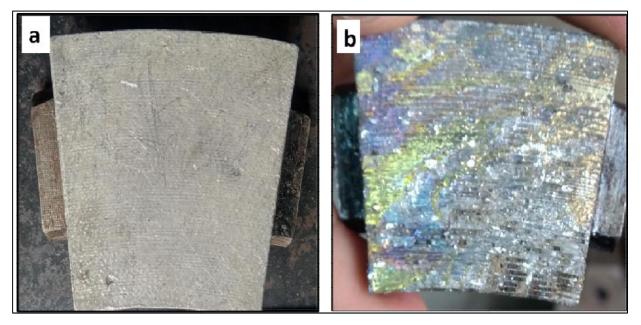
(a) Procured sector shape pad (b) Surface appearance of the pad after removing the Babbitt coating
